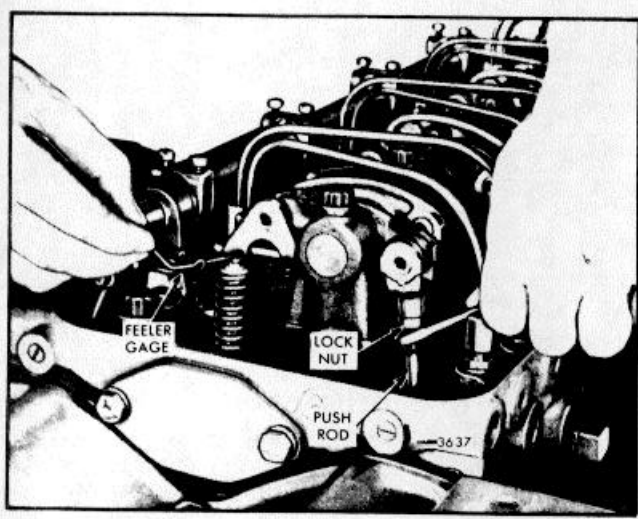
Adjusting Valve Clearance (Four-Valve Cylinder Head)
